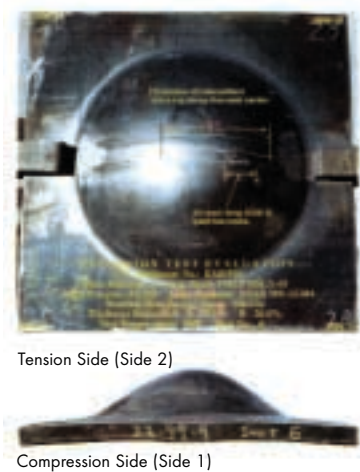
Photograph of Satisfactory 1.25 Inch Thick HSLA-65 FCAW Explosion Bulge Test after Sixth Shot.
